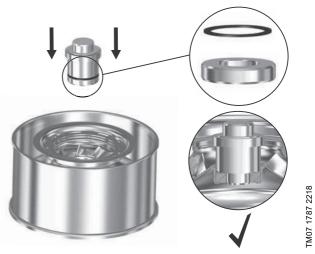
Installing the bush (47c) and retaining ring (47d) with service tool K
